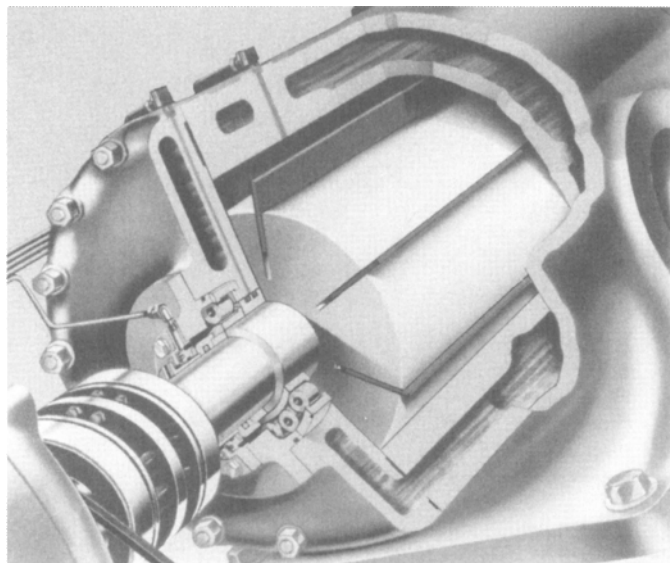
Coupling drive end of Ro-Flo Sliding-Vane compressor showing vanes in rotor or shaft slots and bearing and shaft seal. (Used by permission: Bul. CCB-0072-2. ©A C Compressor Corporation.)
